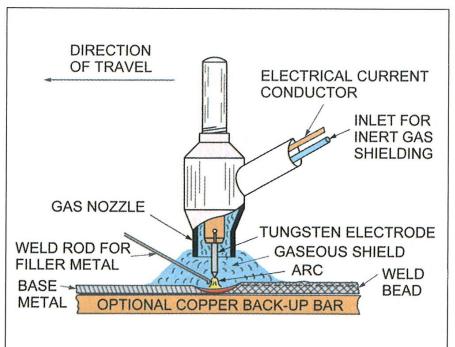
Schematic Representation of Gas Tungsten Arc Welding
